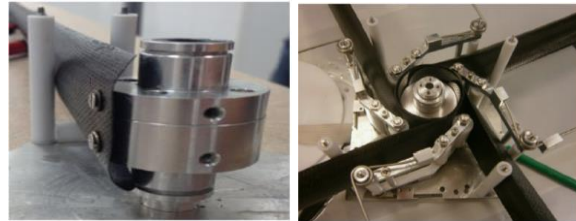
^[3] Boom root attachment to spindle (left) and boom deployer mechanism (right)
